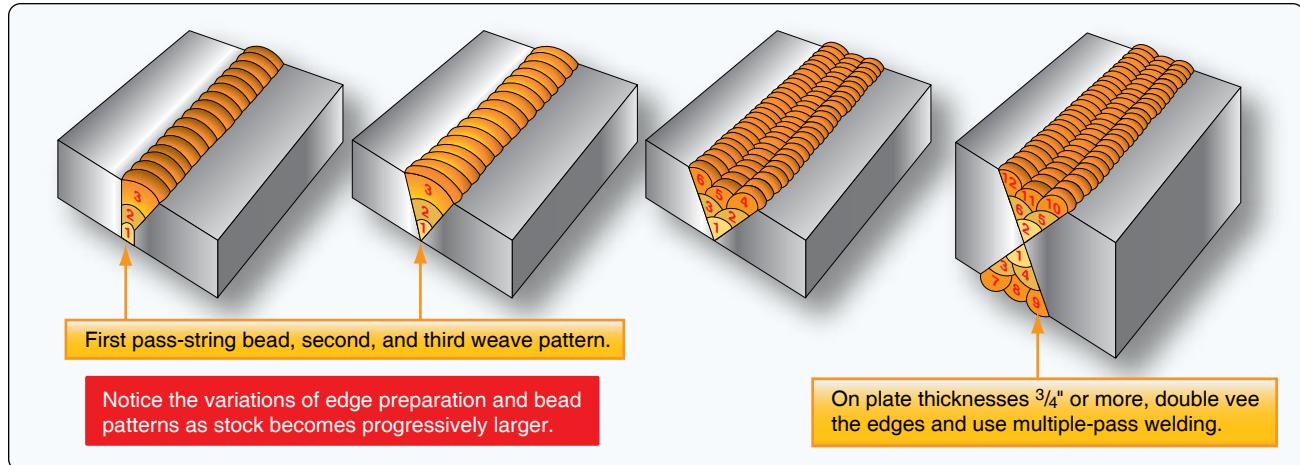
Multiple-pass groove welding of butt joints.
